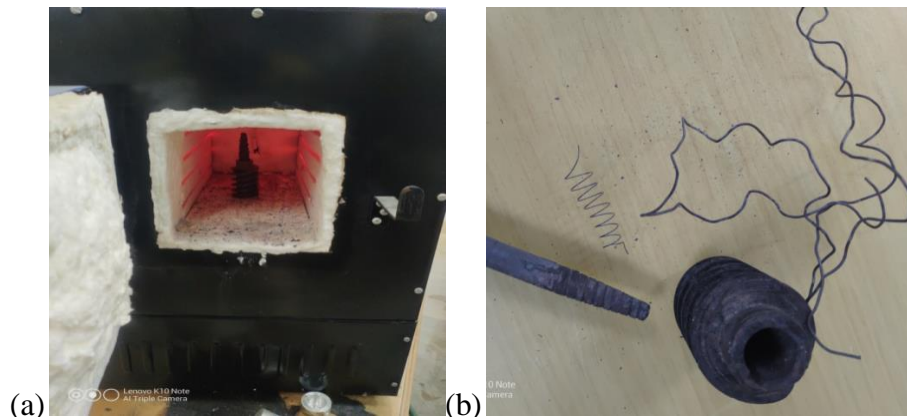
SMA spring showing (a) muffle furnace, and (b) fixture holder
